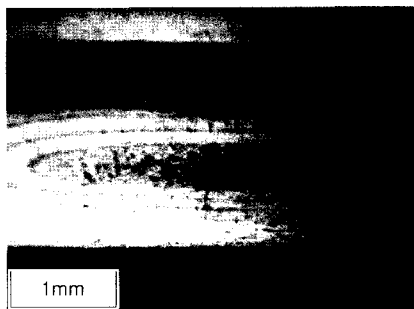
Weld cross section for Experiment 2-1(P)
